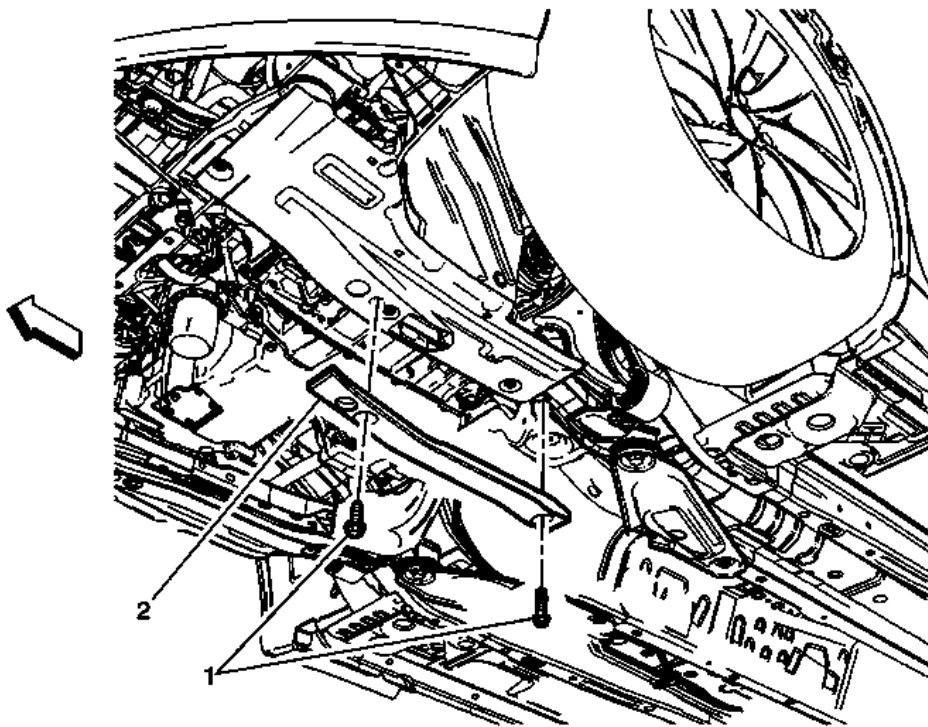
Drivetrain and Front Suspension Frame Transmission Protector (AWD)
